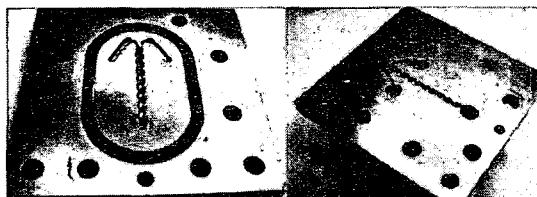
Fabricated caterpillar mixer by electrical discharge machining
